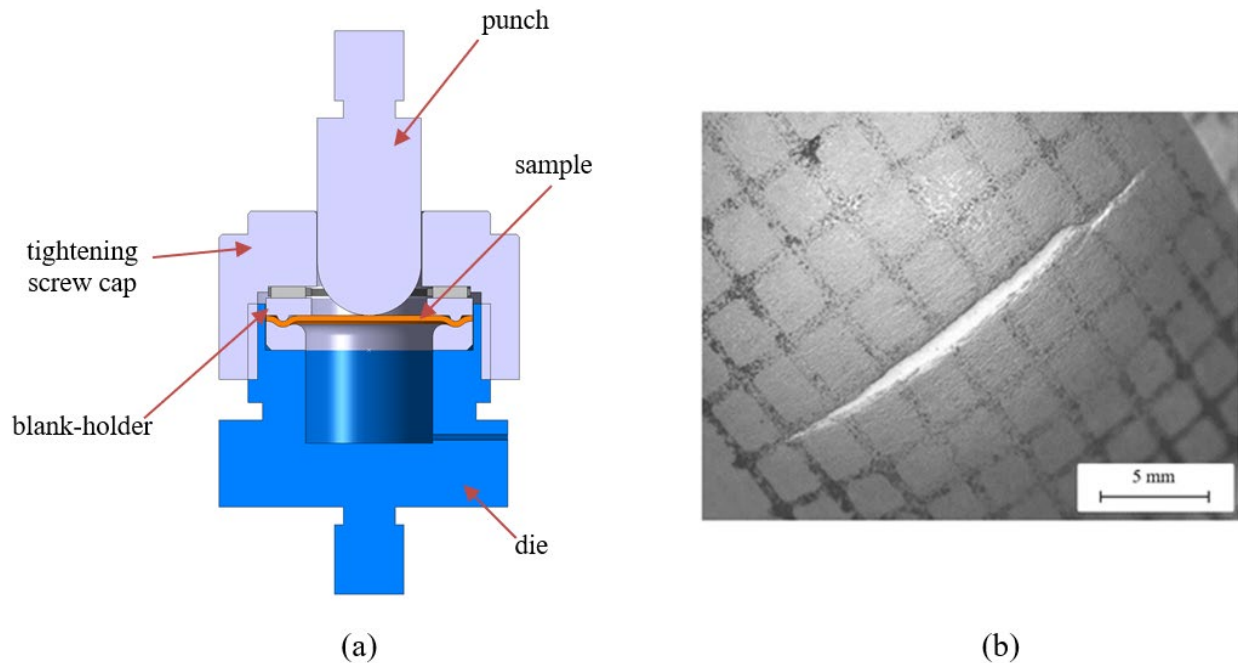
(a) Tooling used in the hemispherical punch tests and (b) disk-shaped sample in metal-polymer-metal composite at the onset of failure.
